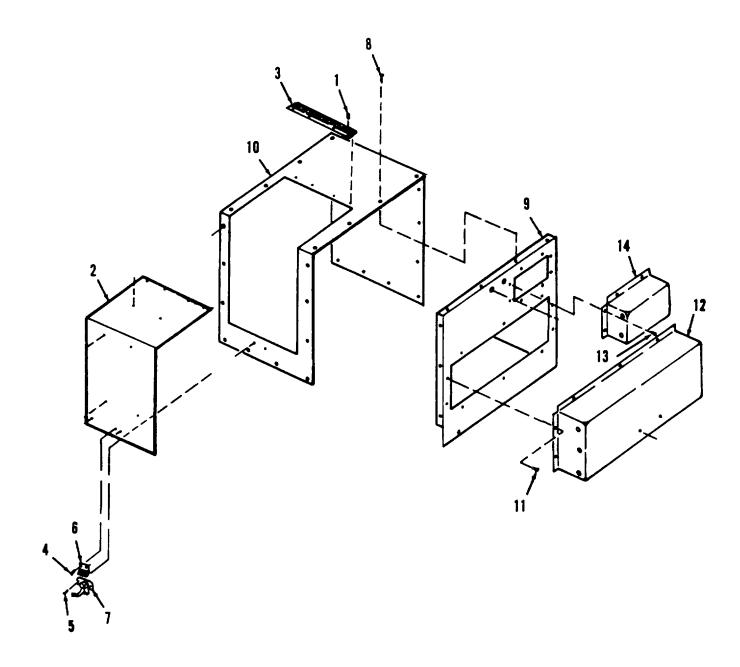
Enclosure Assembly, Inlet Side Disassembly.
